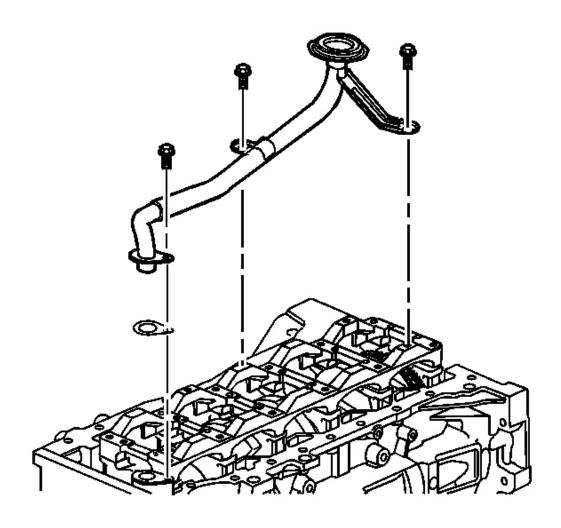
View Of Oil Pump Pipe & Screen Assembly Courtesy of GENERAL MOTORS CORP.
